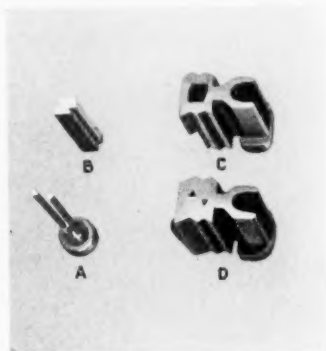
Shedder, insert, and perforator punch for solderless cord tip punch and die
